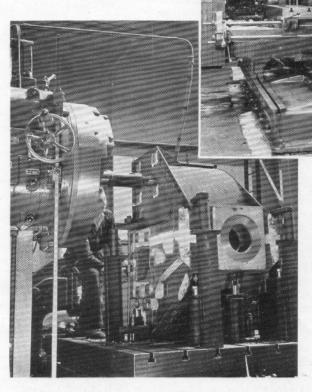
(left)—Spotfacing locating pads on the castor bracket which has been turned 90 deg, with the revolving table from the position shown in Fig. 36.
